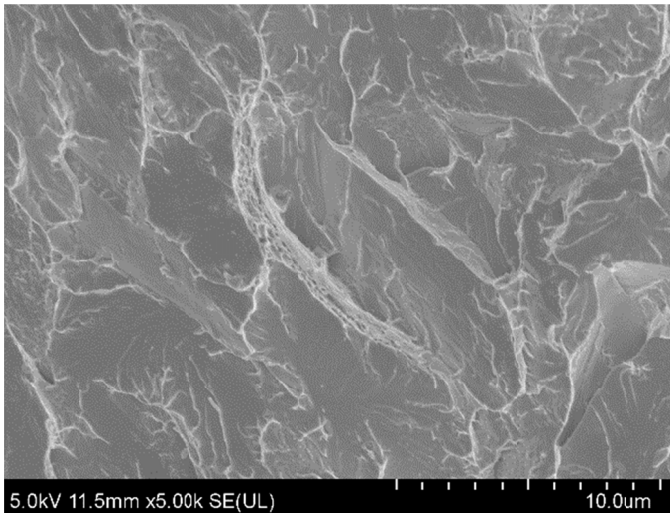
Fracture surface of samples with  $a/t$  factor higher than 0.3
